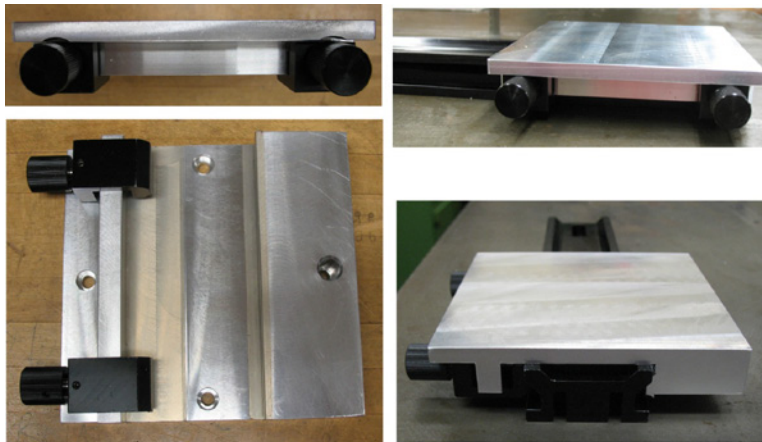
, Pictures of custom optical rail carriage cut from a solid aluminum block. Clockwise from upper left: Side view of carriage showing knobs of clamping blocks, Side view of carriage secured to optical rail, Top view of carriage secured to optical rail, Bottom view of carriage showing holes used to secure mirror mount to carriage and clamping blocks.
